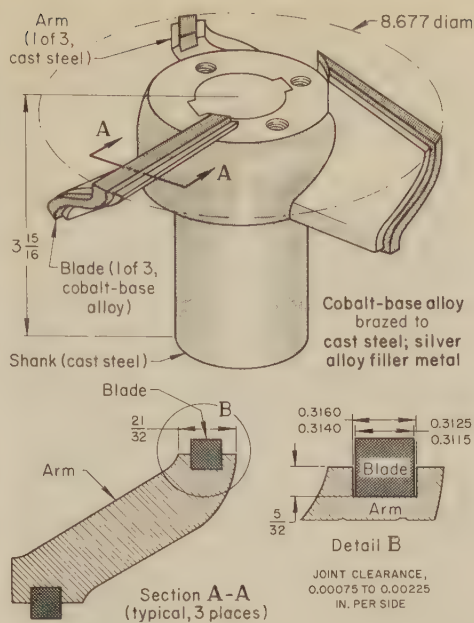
Cutting impeller, with inserted blades of cobalt-base alloy, that performed satisfactorily in service only after joint clearances were controlled in brazing (Example 582)
